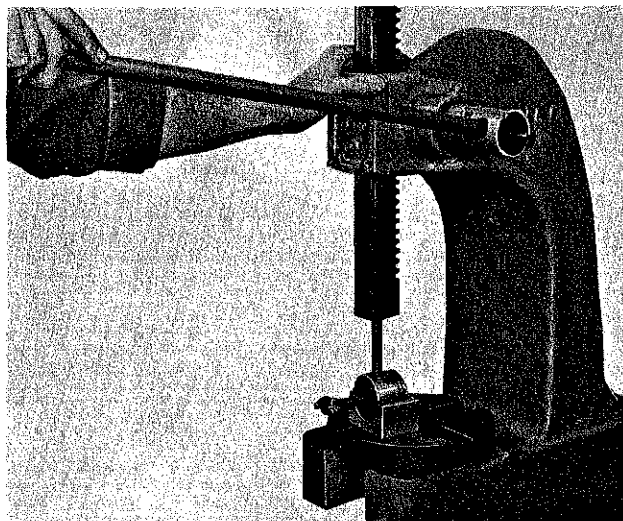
Removing the piston pin and closed-end bearing from the piston using an arbor press, piston pin driver and piston holding block. The holding block has a large opening on the bottom to allow the bearing to come out. If the piston is properly heated before pin removal, the bearing will come out undamaged.
